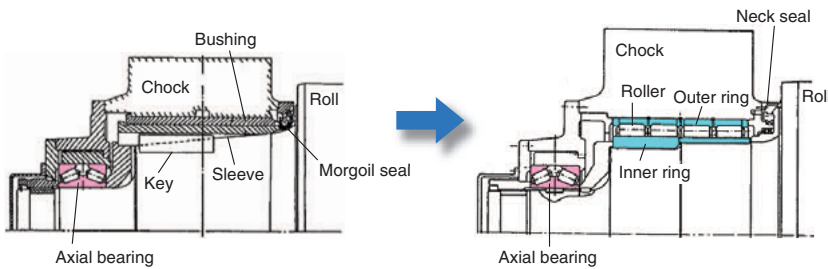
Replacement of oil film bearing with rolling bearing for back-up roll of rolling mill
